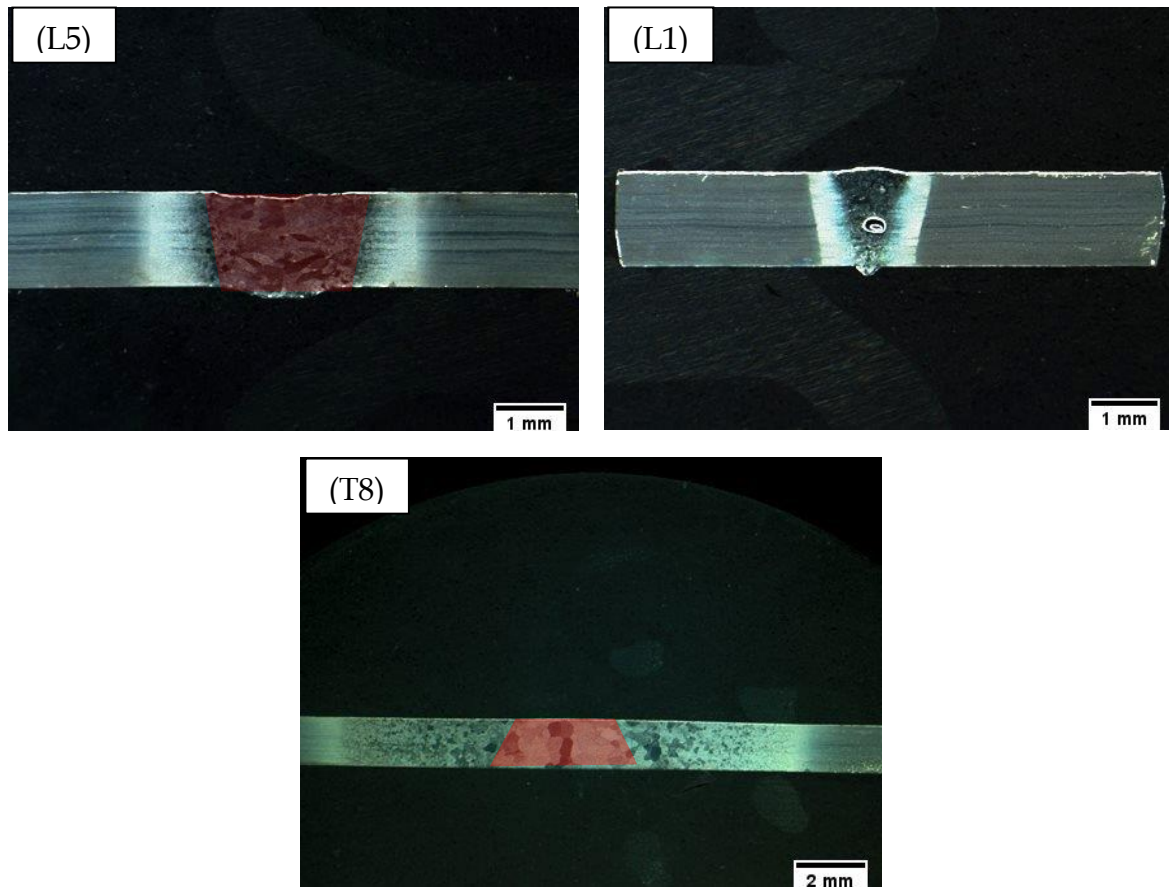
Weld cross sections of LBW (L5, L1) and GTAW (T8).
